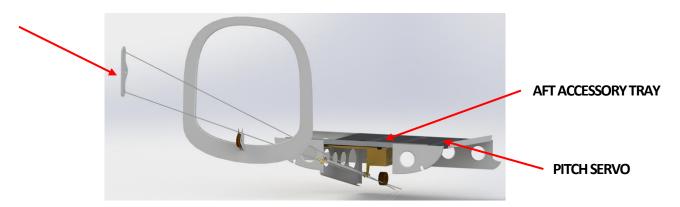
CESSNA 172 PITCH SERVO INSTALLATION LOCATION
